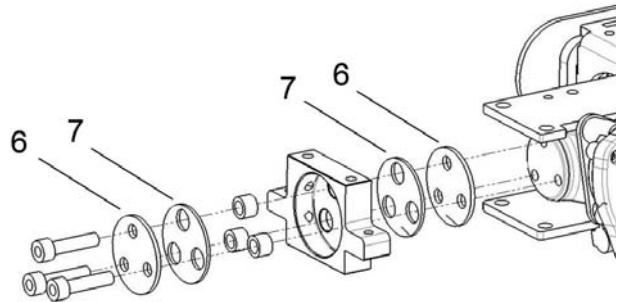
Mount the actuator washers (6) and dampfer (7).
